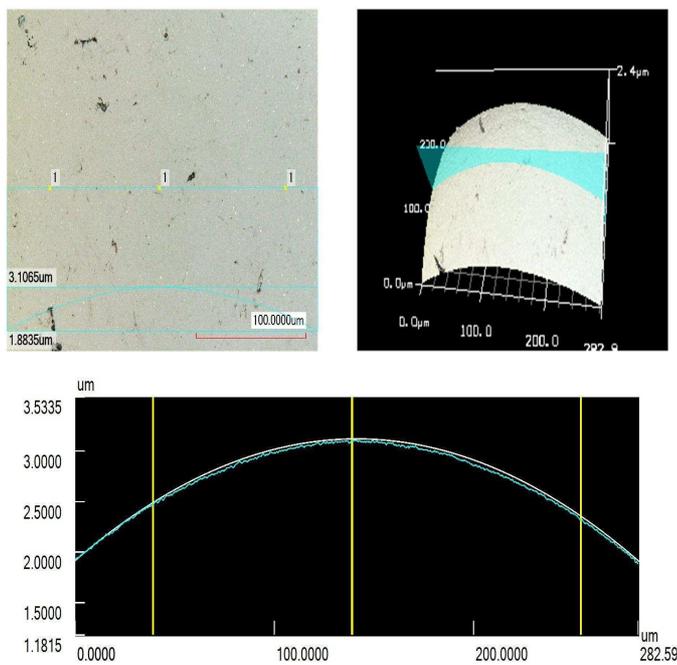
Radius measurement of the High Precise Spherical Surface using the 3D laser scanning microscope
